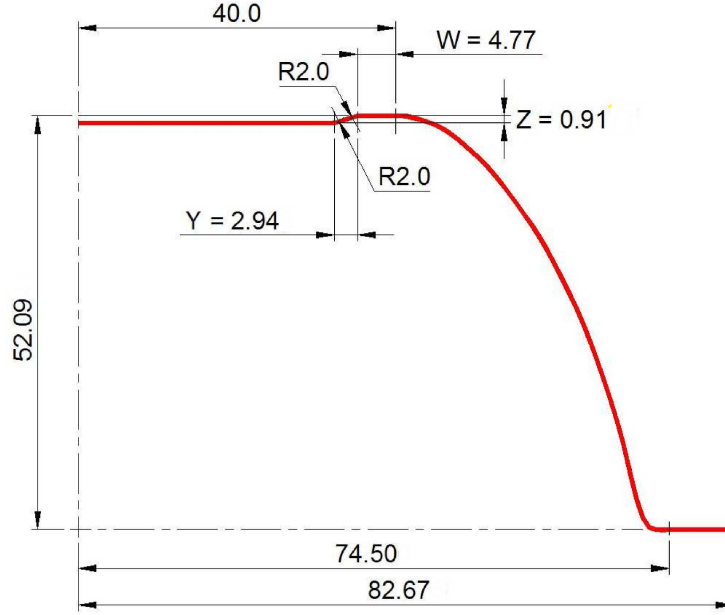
Bowl specimen drawing (all dimensions are in mm).
